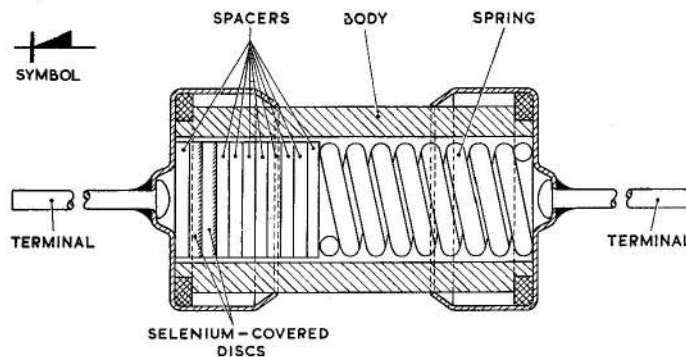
Sectional view of rectifier, Westinghouse, Type 16K2
